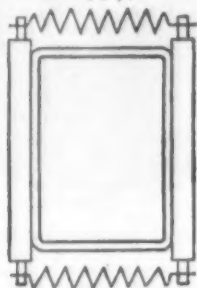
REYNIER ELEMENT—PLAN OF COMPRESSING ARRANGEMENT.
